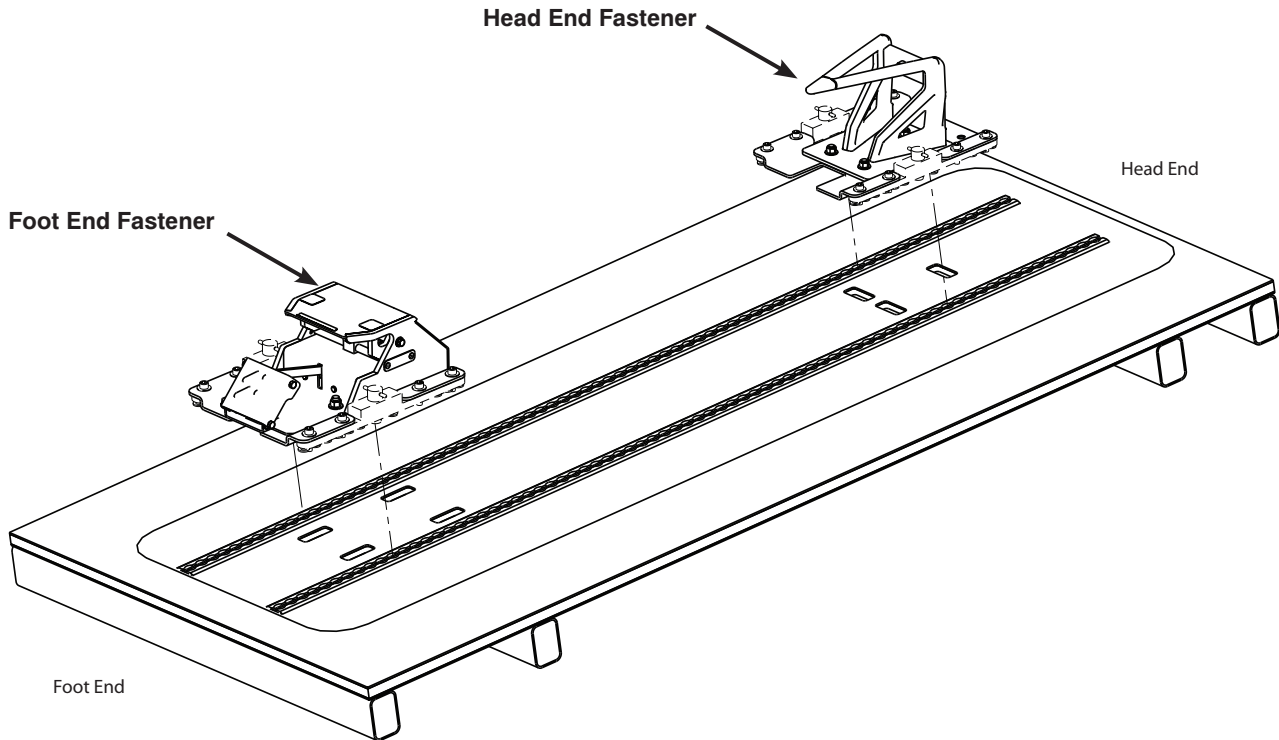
Head End and Foot End Fastener - Floor Track Installation
